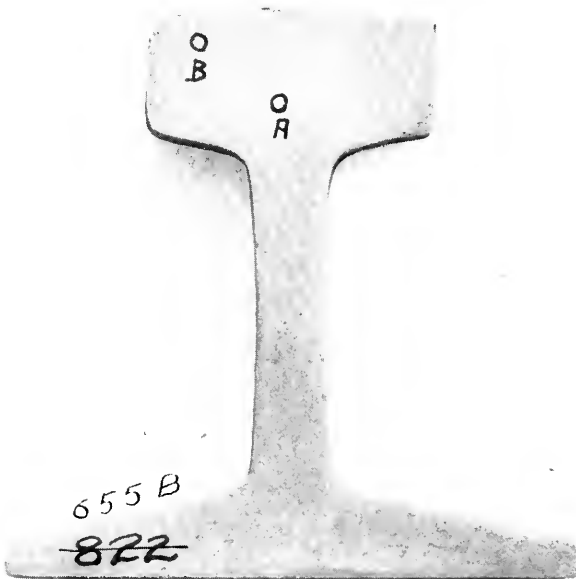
B. LIGHT ETCHING OF RAIL 655.
